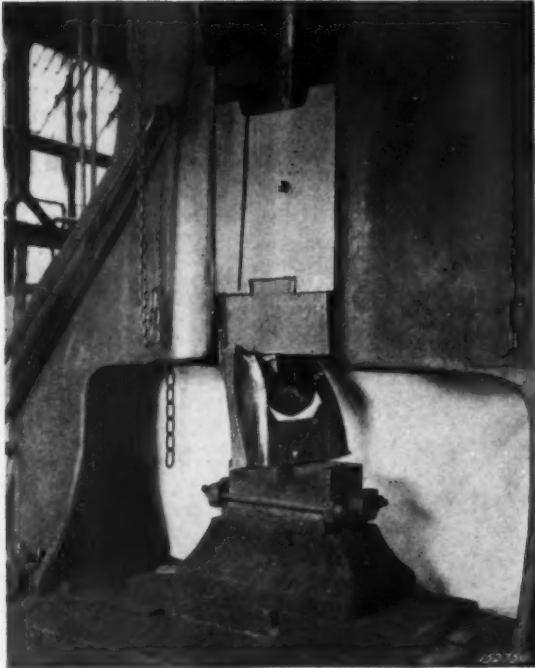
SHOCK TEST PIECE AND 2,000 TON STEAM HAMMER USED IN TEST
